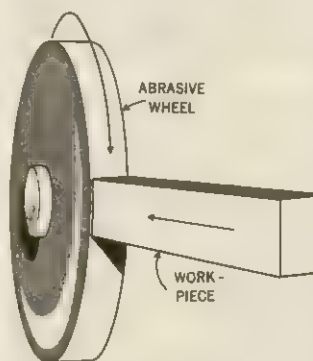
BASIC MACHINE-TOOL OPERATIONS: GRINDING
